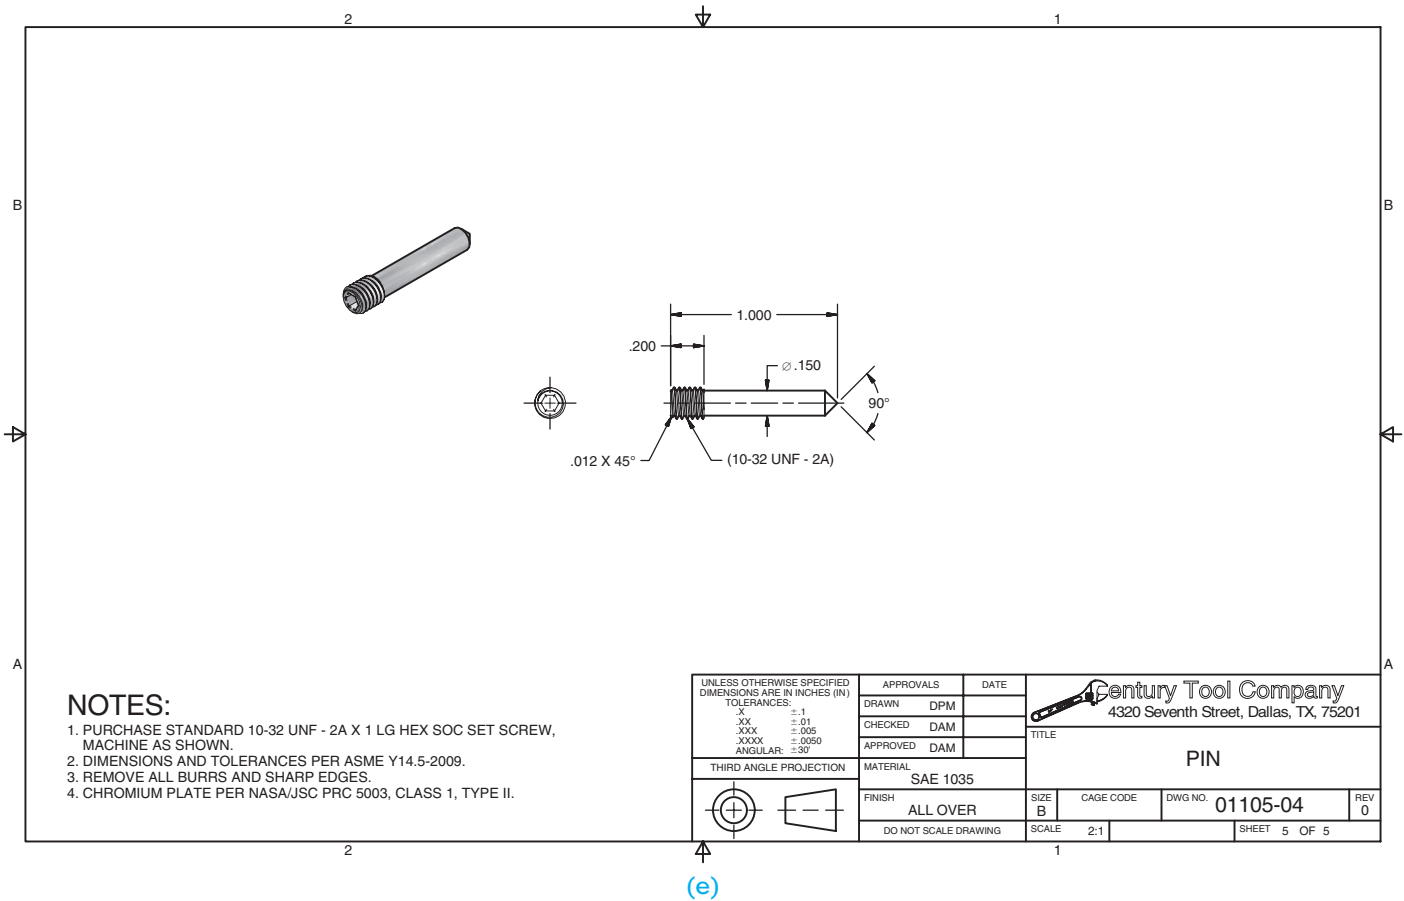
(e) Detail drawing of the new wrench PIN part.
